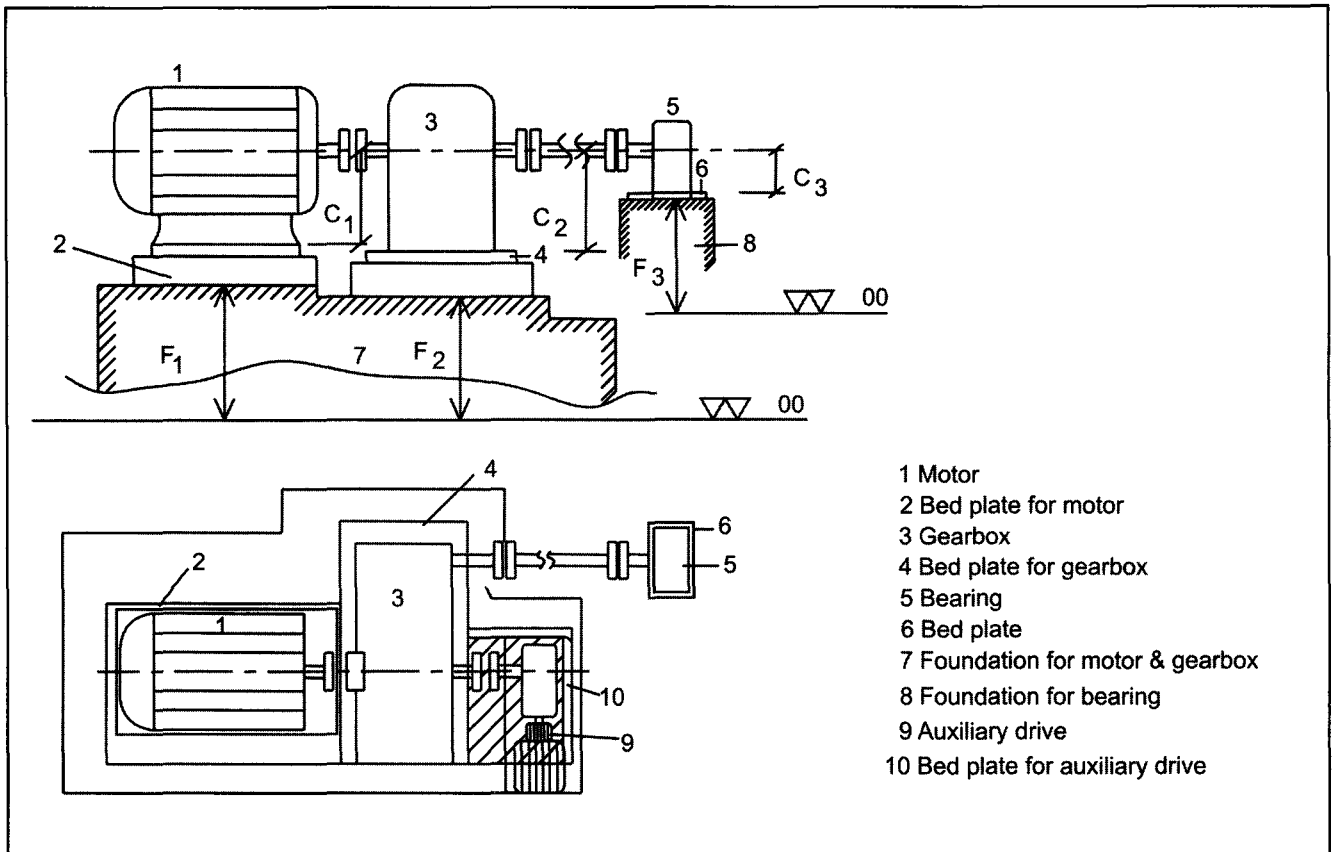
Separate bed plates for motor and gearbox for large machines.
